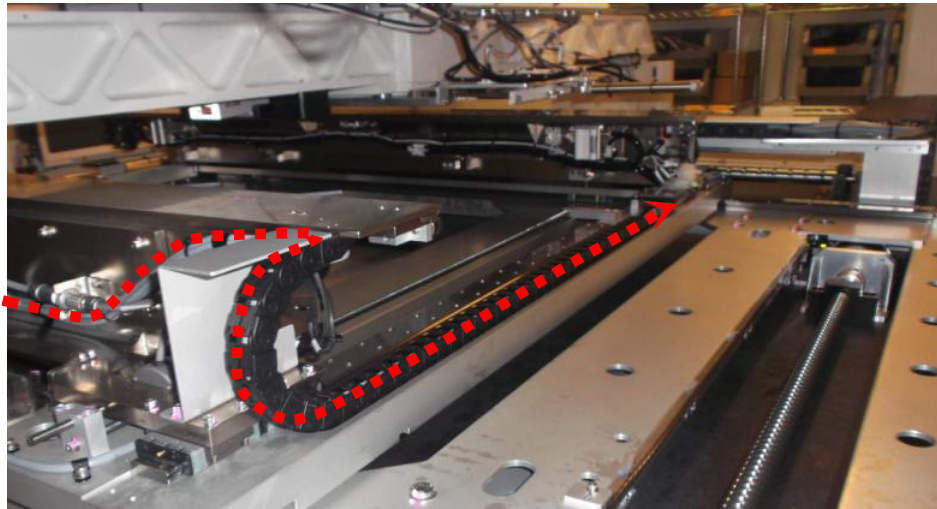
Stepper Motor Cable Removal (AWA E-Chain)
